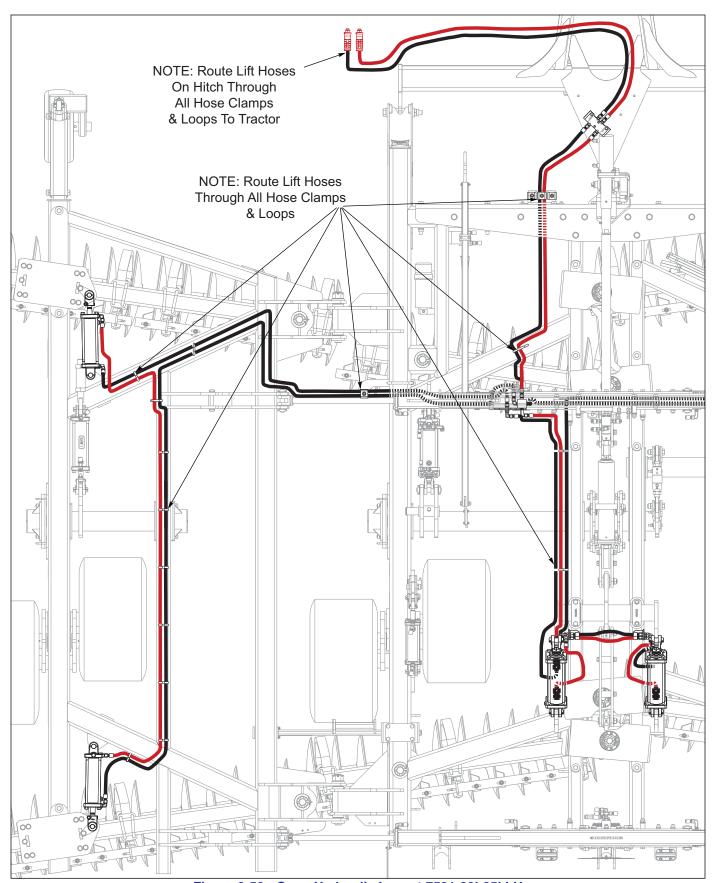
Gang Hydraulic Layout 7531-32'-35' LH
